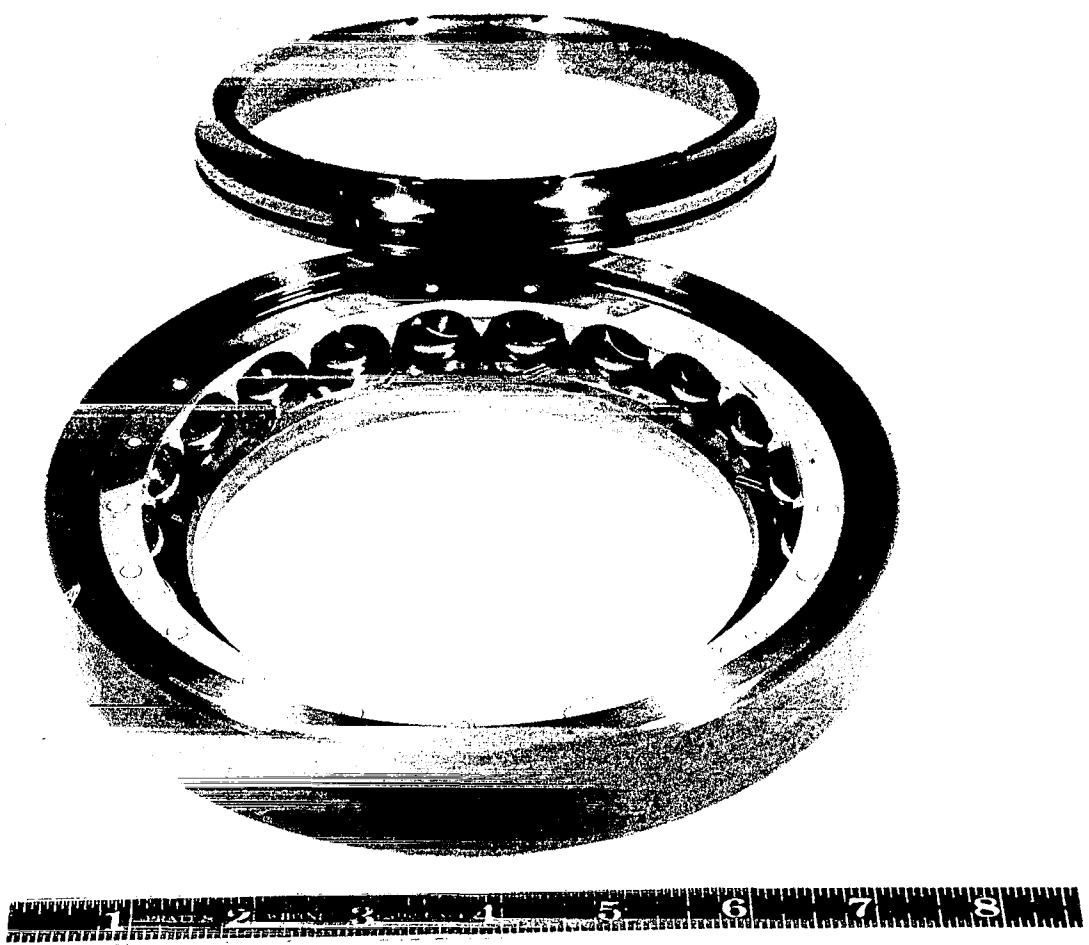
Post-Test Appearance of Drilled-Ball Bearing S/N 2600A-1 Before Disassembly With Load-Carrying Inner Ring Removed
